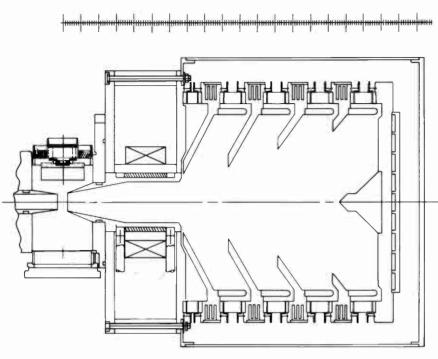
Mechanical design of the multistage depressed collector assembly. Note the "V" shape of the 4-element system.
